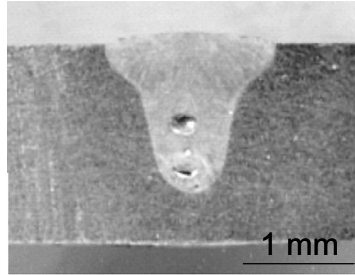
Cross-section macrograph of Nd:YAG laser weld; bead on plate; EN AW-5082; $P_{\text{Nd:YAG}} = 3 \text{ kW}$; argon flow 25 L min^{-1} ; $v_w = 1.5 \text{ m min}^{-1}$
